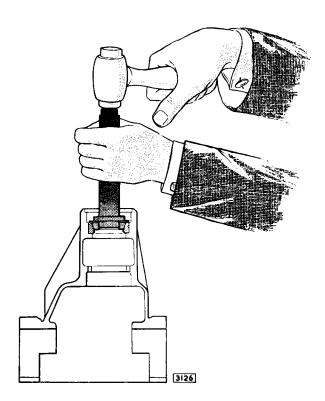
Replacing a pinion outer bearing outer race using Churchill Tool No. 550 with adaptor No. SL 550-4
